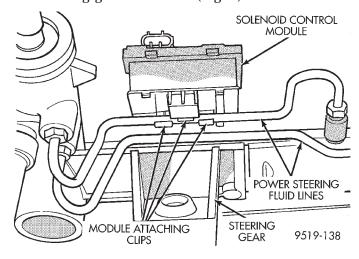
Solenoid Control Module MountingTo Fluid Lines
